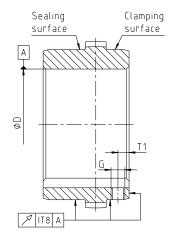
Clamping/sealing surfaces of types: FA, FAB and FR | Illustration 22: Clamping/sealing surfaces of types: FB, FAB and FH
